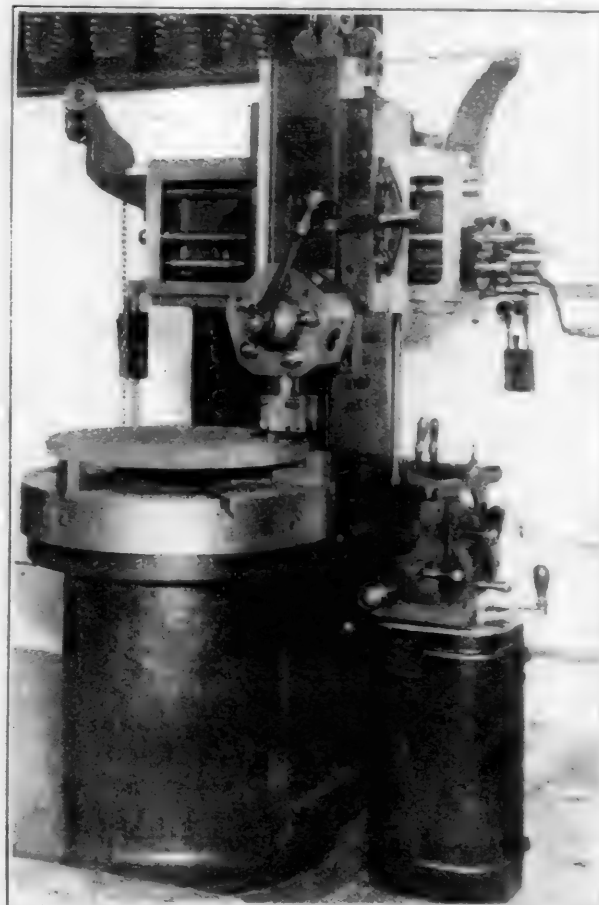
31-IN. ROGERS MACHINE TOOL COMPANY BORING MILL AND RHEOSTAT.
